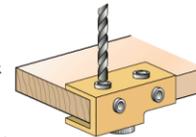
A drilling jig that has been clamped to the corner of the workpiece to get the holes in the correct place
